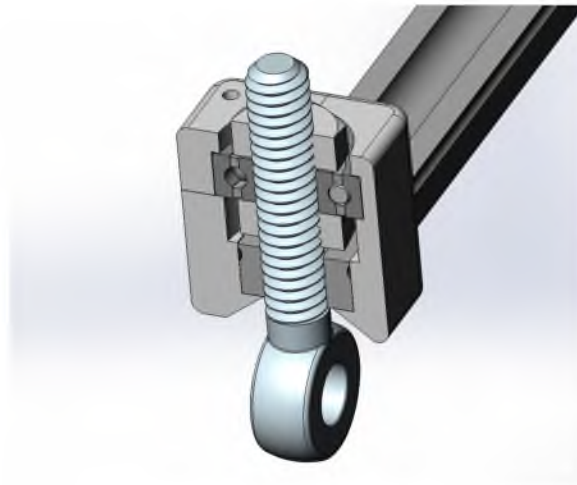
CAD model showing the cross-section of the distal bearing housing. The eyelet rotates with the bearing and is held in place by jam nuts.
